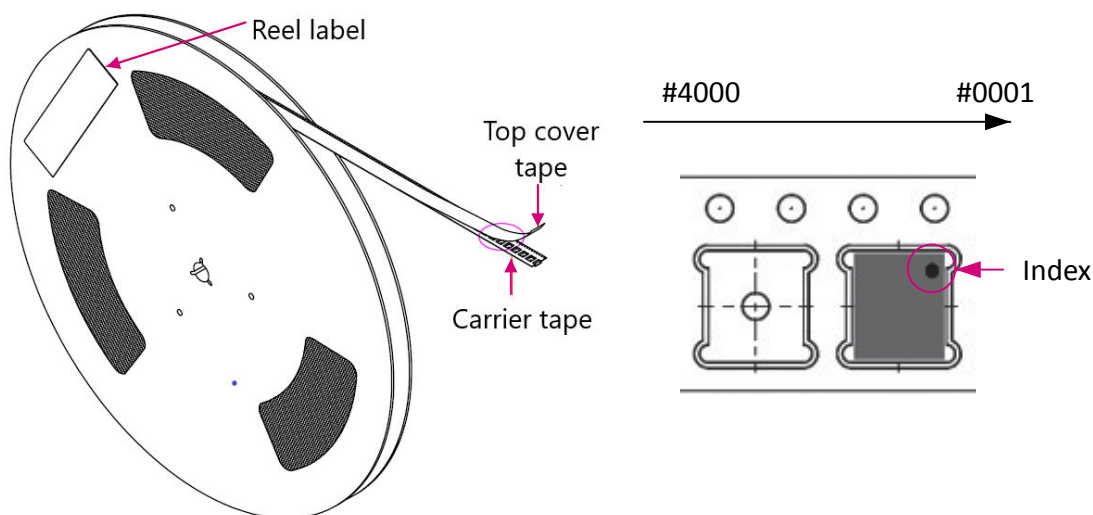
Embossed carrier tape for DFN8 (5 × 6 mm)
